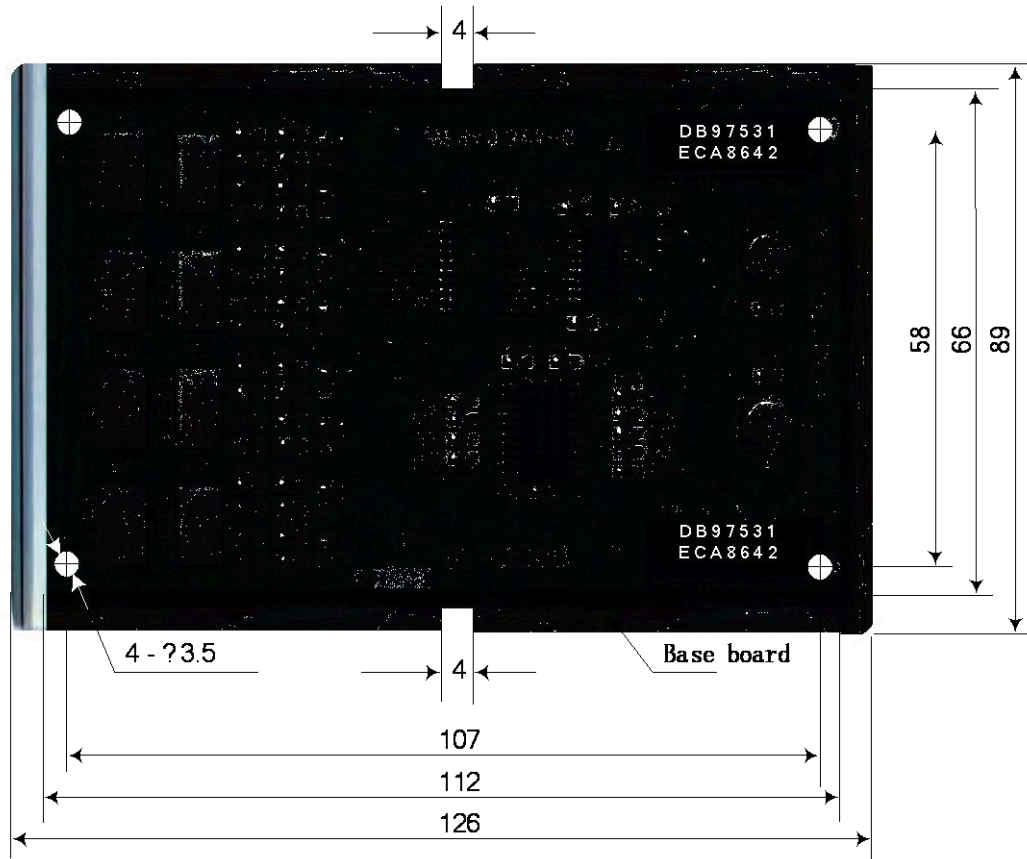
Call Extension Board BL2000-CEB Shape & Dimension
